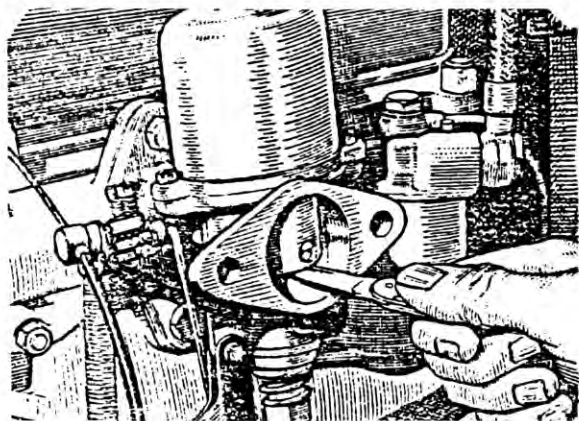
Piston may also be lifted with knife blade if air cleaner is removed.
